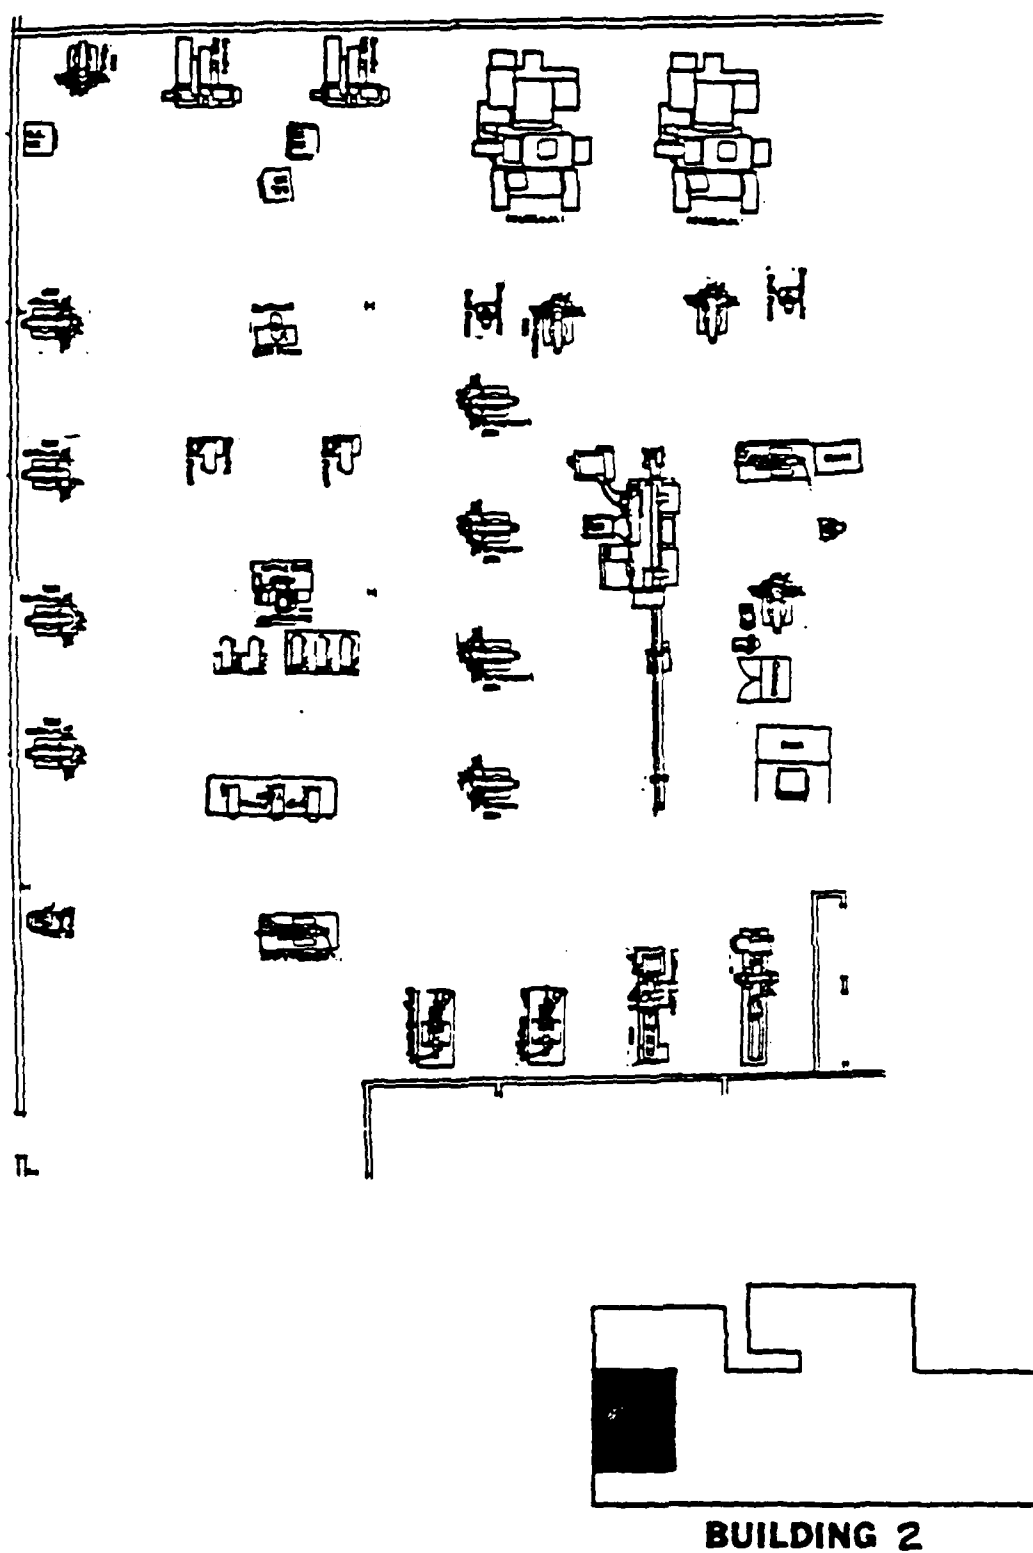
IMPROVED MACHINE SHOP LAYOUT
